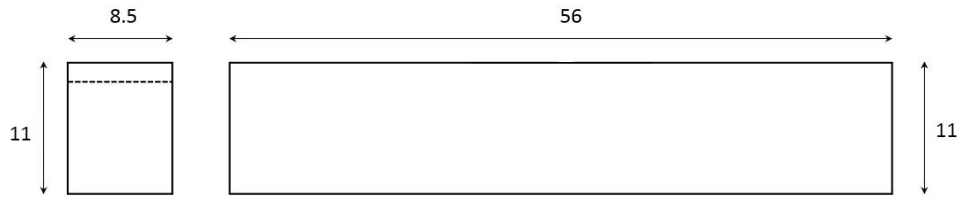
The dimensions of notch-impact specimens after rough machining given in millimeters.
